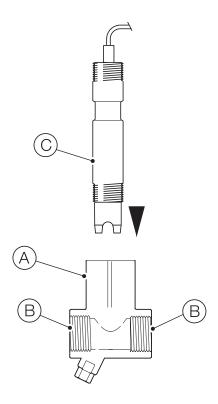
Screw-in T-piece assembly installation - BSP/NPT
